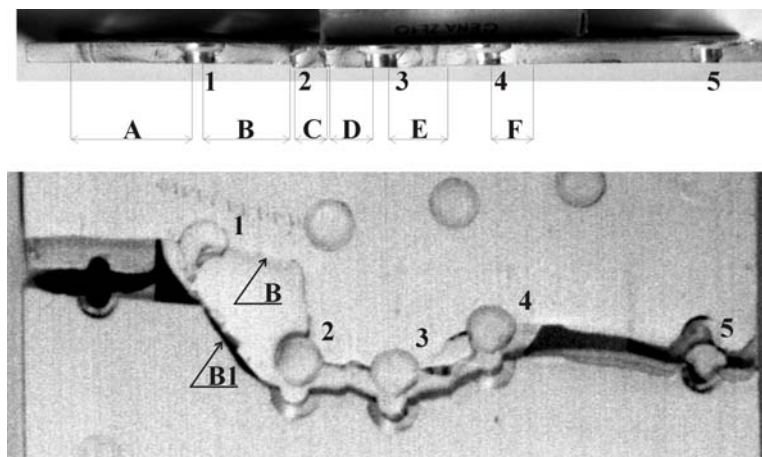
Fracture and the position of skin crack. Numbers designate the rivet holes and letters refer to the fracture sections.
